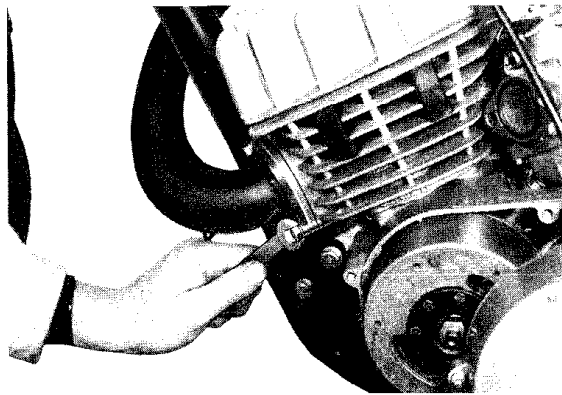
Unscrewing exhaust pipe fitting bolt
